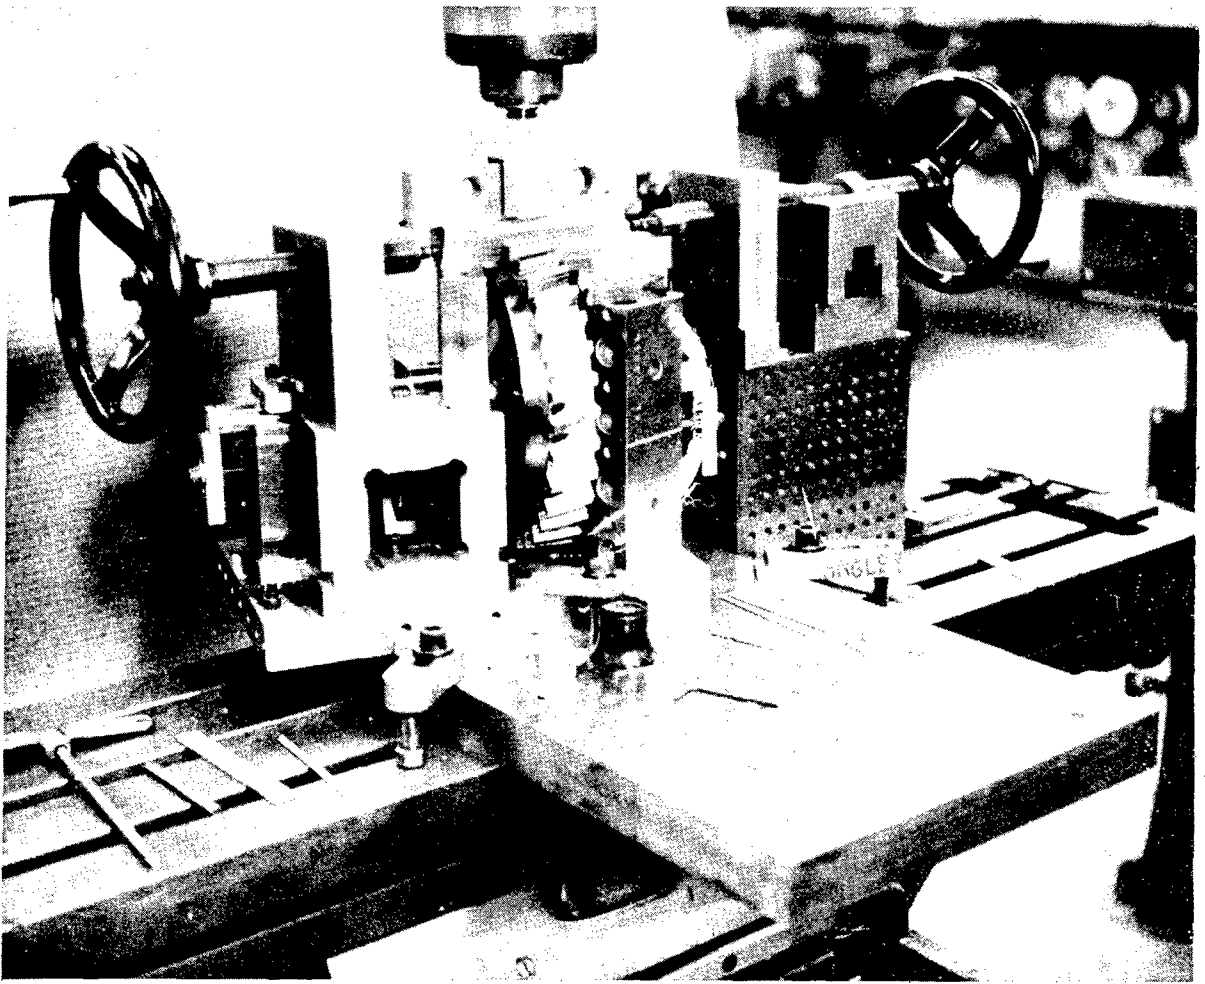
Pinhole Broaching Setup - Fluid-Cooled Turbine.
